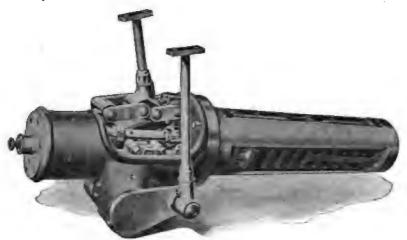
Valve-plug and Gear, Wheelock Engine, see Figs. 214, 266.
